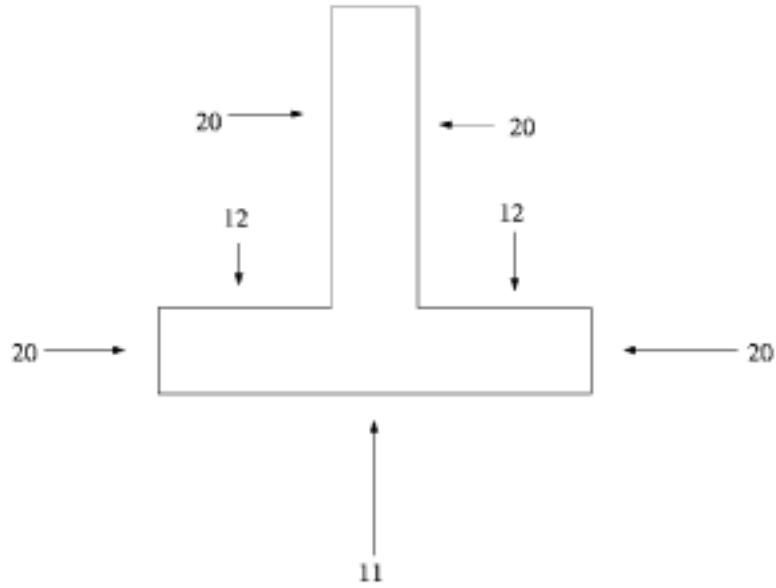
Cross -section view of face types for the first valve. Note that the valve and the valve stem are solid.
